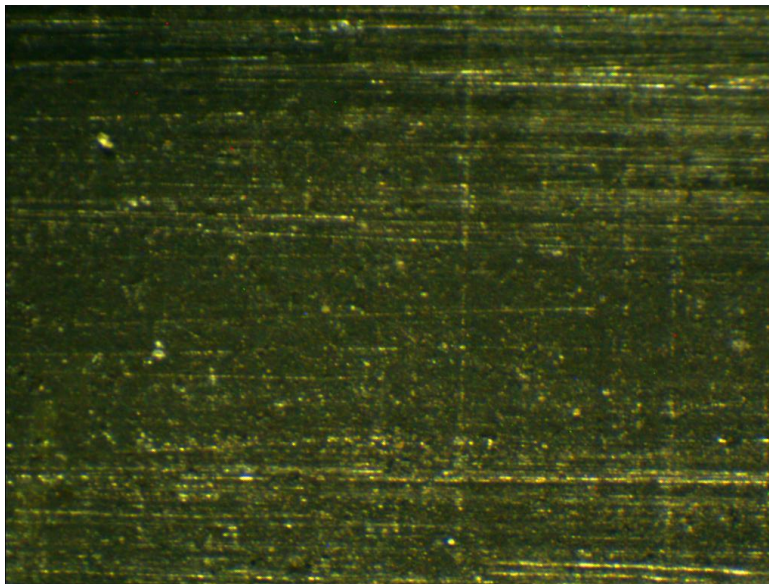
Surface of the high performance grooved bearing after rig test (x40)
